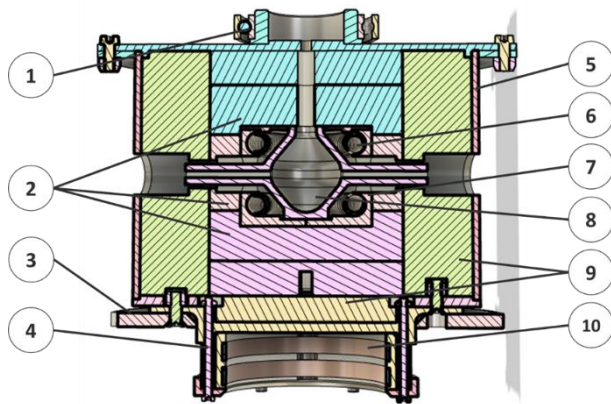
Rotational bushing assembly; (1) – Bearing Mount, (2) – UltraBoard® Isolation, (3) – Drive Gear, (4) – Bottom Bearing Mount, (5) – Aluminum Housing, (6) – Heating Wire, (7) – Ceramic insulation holding the bushing and the heating wire, (8) – PtRh Bushing, (9) – Promalight® Isolation, (10) – Rotational power supply
